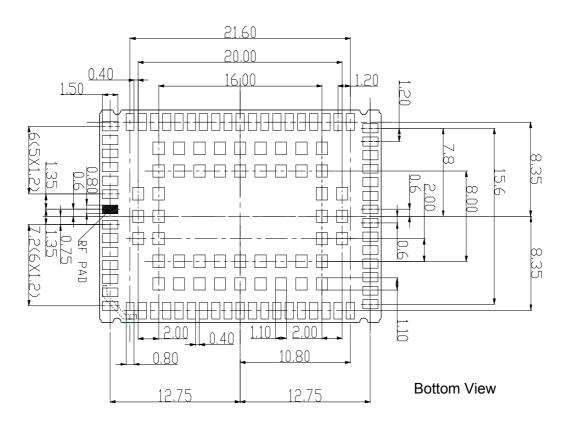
Dimensions of EMS31-X (all dimensions in mm, with tolerance +/-0.1mm) - bottom view
